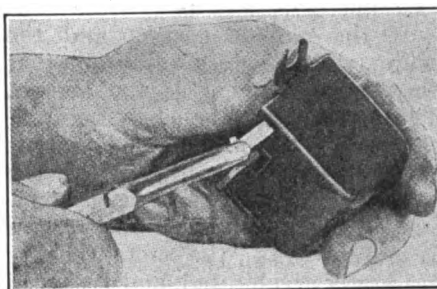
WITHDRAWING THE BAR FROM THE LATER TYPE OF CUT-OUT SO THAT THE COVER MAY BE REMOVED
